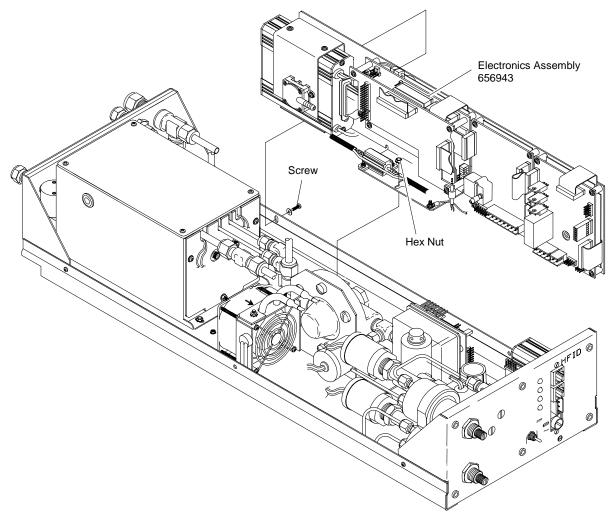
REMOVING ELECTRONICS ASSEMBLY FROM CHASSIS
